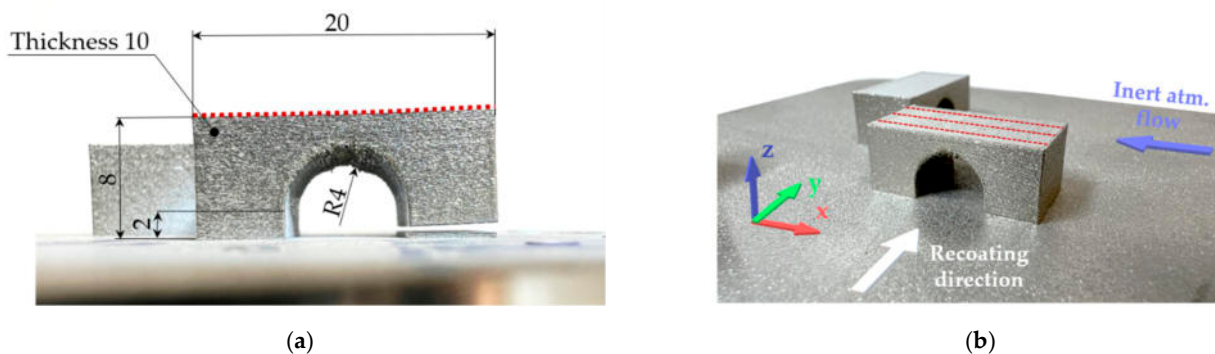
Bridge-shaped specimens: (a) specimen in the cut state with dimensions and marked top surface (red dotted line); (b) layout on the platform in the as built state with marked virtual section for measuring top surface distortion.
